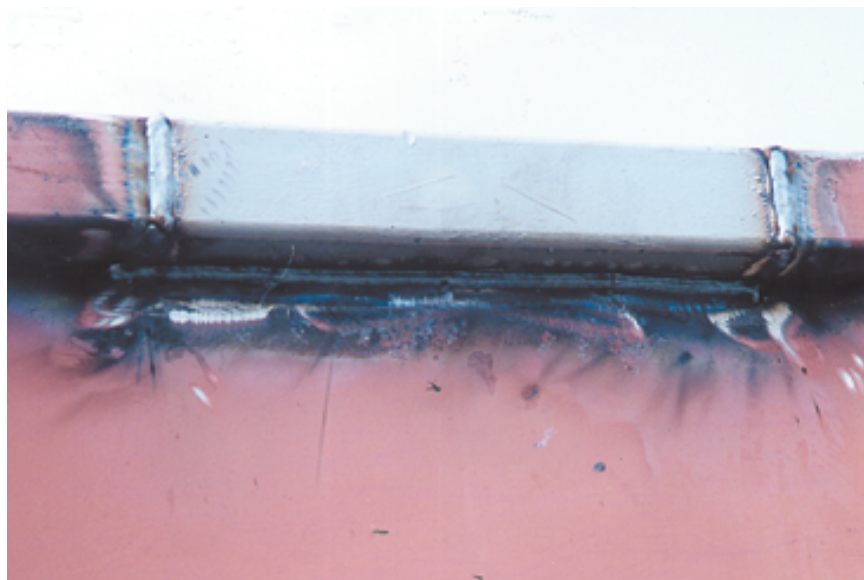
(to right) / Tube-type top side rail section continuously welded (interior view)
